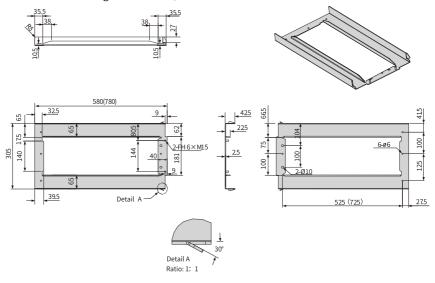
Dimensions of the bottom mounting bracket for T10 models
